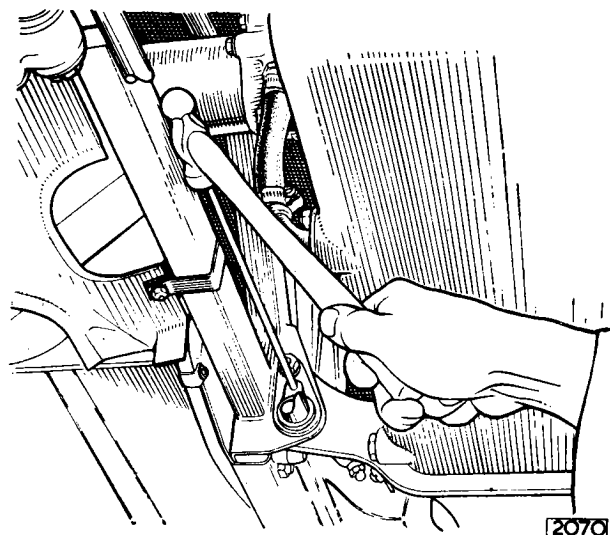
Driving in the locating bars. (The torsion bar has been cut away for illustrative purposes).
